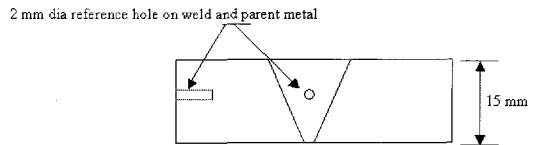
Weld joint for assessing sensitivity due to welding Processes. The artificial defects are also shown
